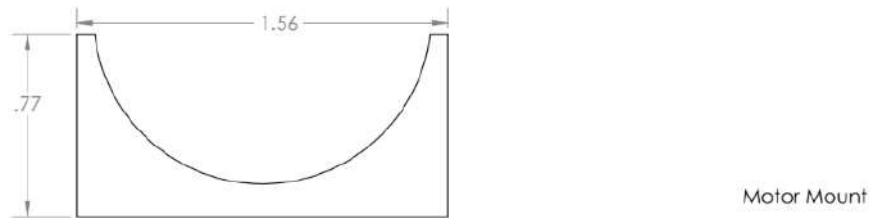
Circular Mount: We used 2 of these circular mounts per fully assembled motor mount to secure motors in place evenly.
